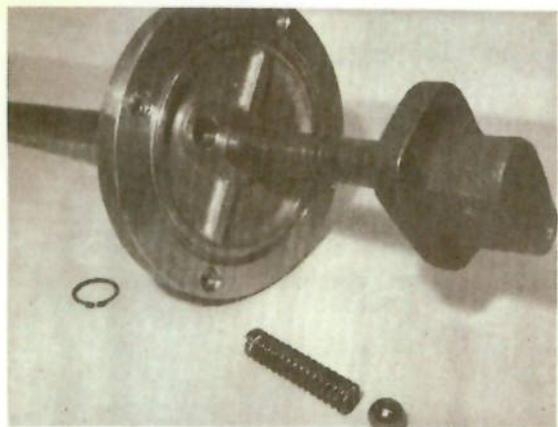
SHIFT COVER ASSEMBLY DIS-ASSEMBLED.
